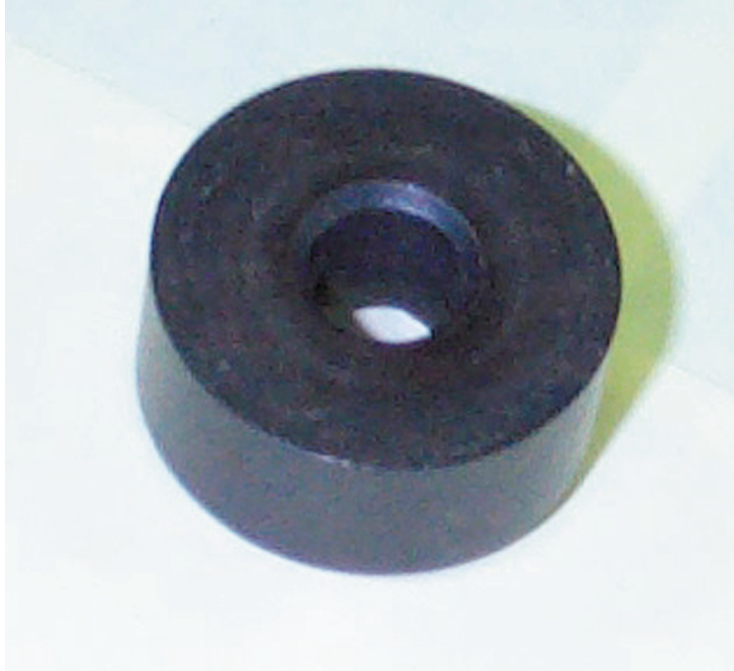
Hardened 4340 bearing steel spacer used in test setup (long bolt).
